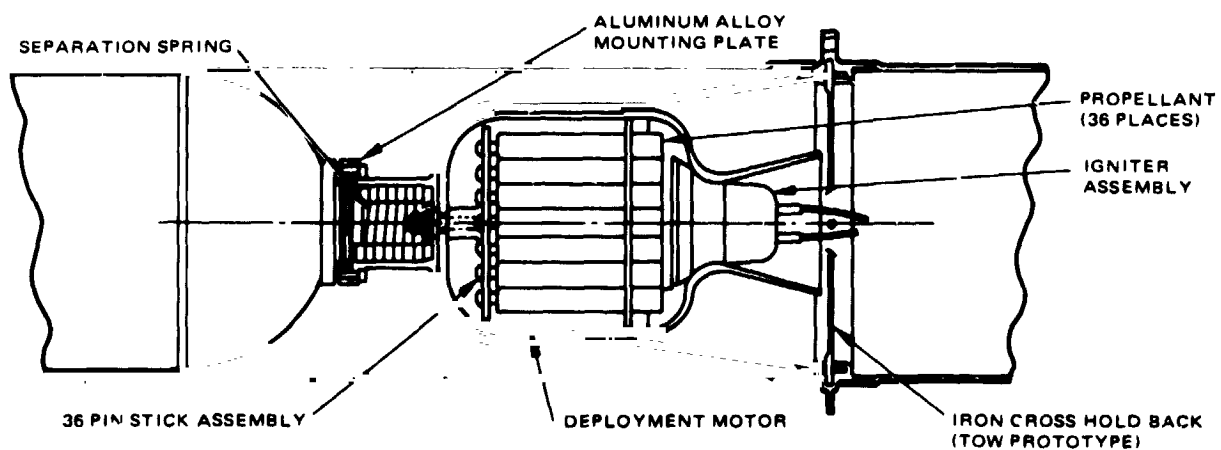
PENETRATOR DEPLOYMENT MECHANISM
